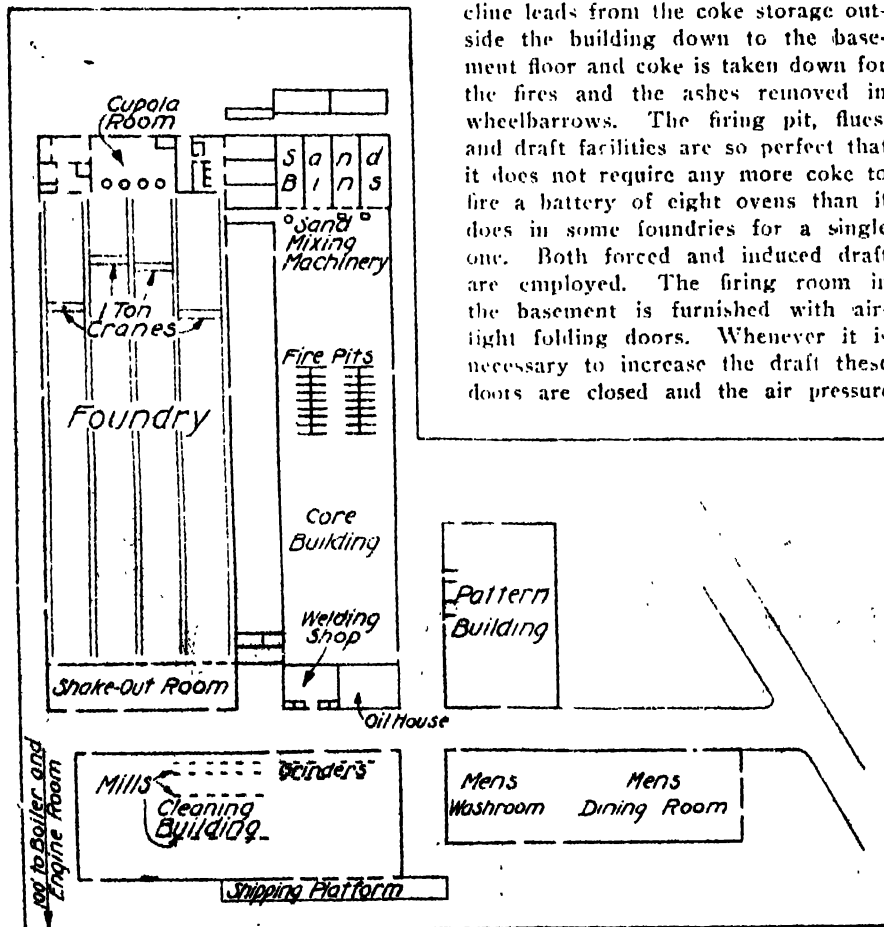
FLOOR PLAN CENTRAL FOUNDRY, SAGINAW PRODUCTS CO.
